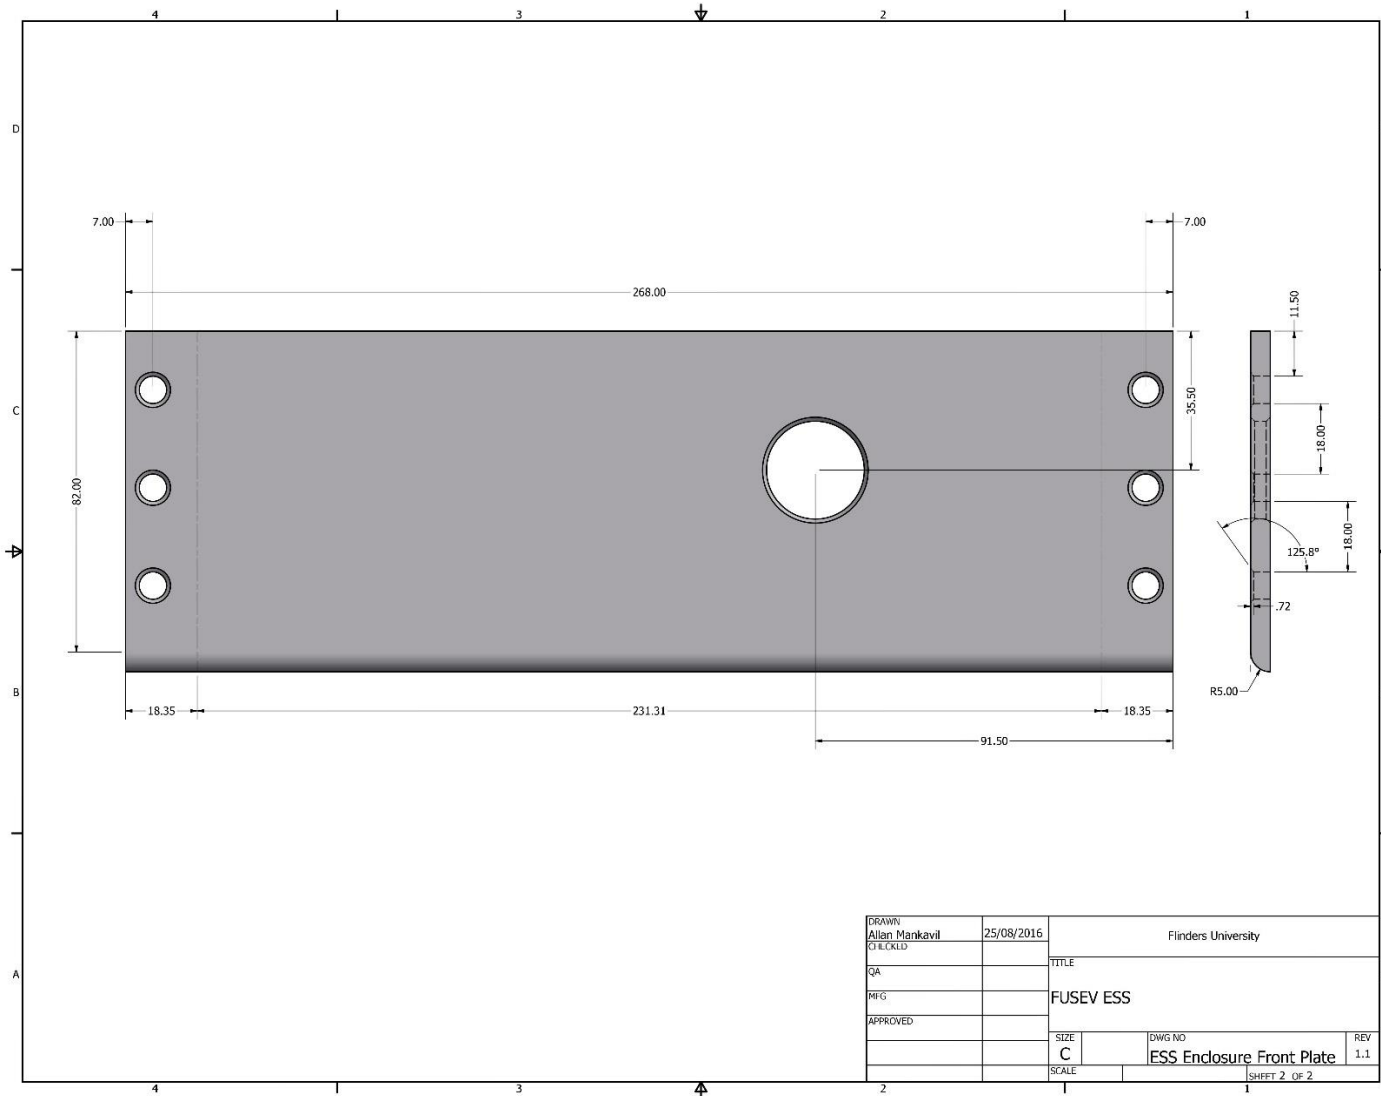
The mechanical drawing of the ESS Enclosure's unfolded Front Plate.
